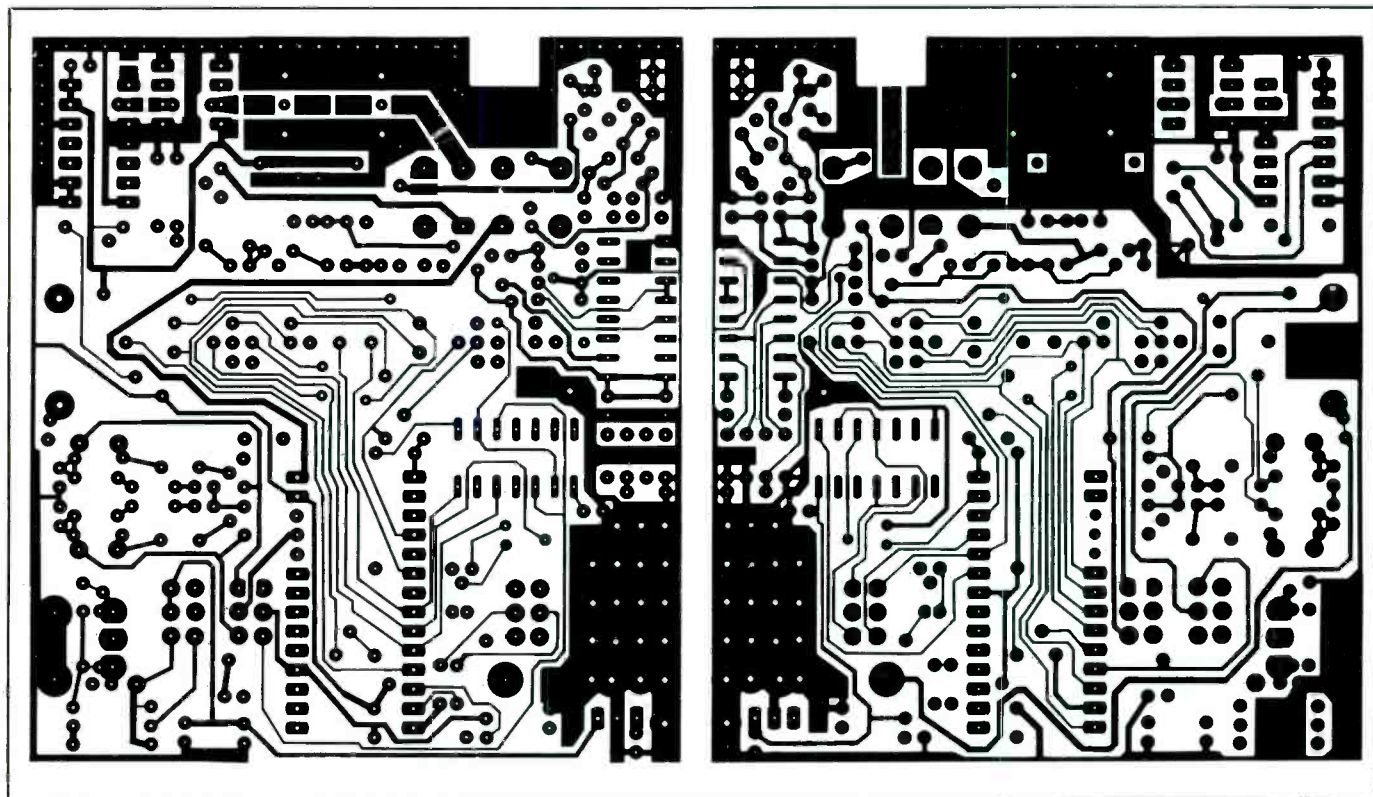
Actual-size top (left) and bottom (right) etching- and-drilling guides for project's printed-circuit board.
